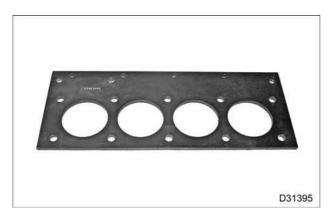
Cylinder Head Pressure Test Plate ZTSE4534
